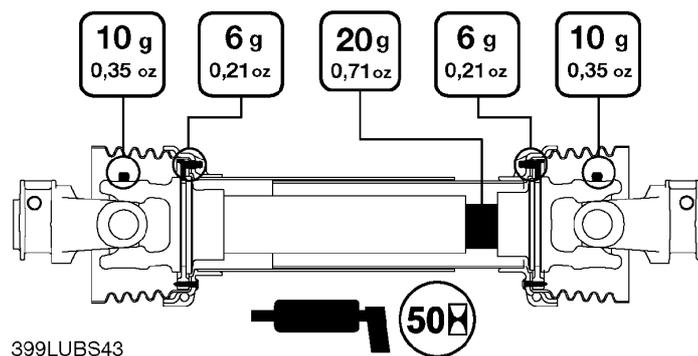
PTO shaft 7G3N111CE0070F3A lubrication points. Mounting directions
